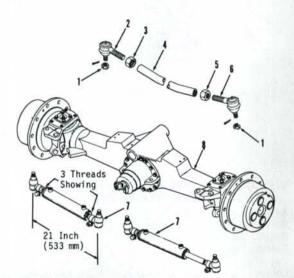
Front drive axle, tie rod and steering cylinders removed from tractor.
